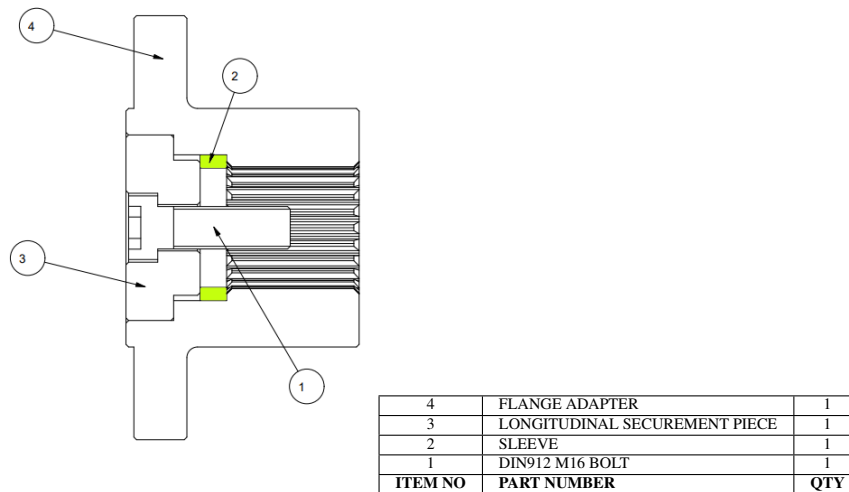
Updated design of the flange adapter between motor shaft and the torque flange with the sleeve highlighted
